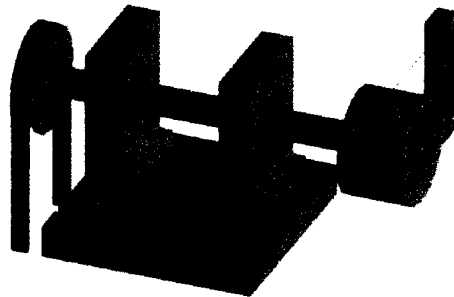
Schematic of endurance test for the deep groove ball bearing
